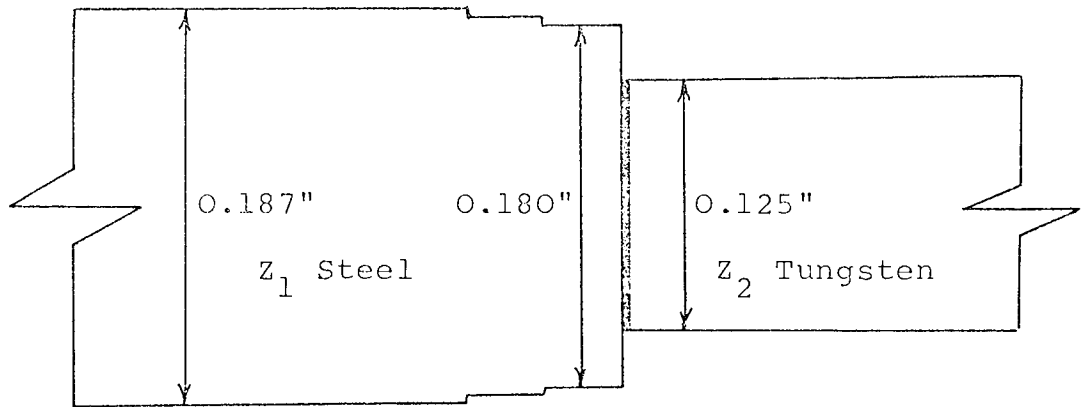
A matching section on a steel rod to match the impedance of a smaller diameter tungsten rod.
